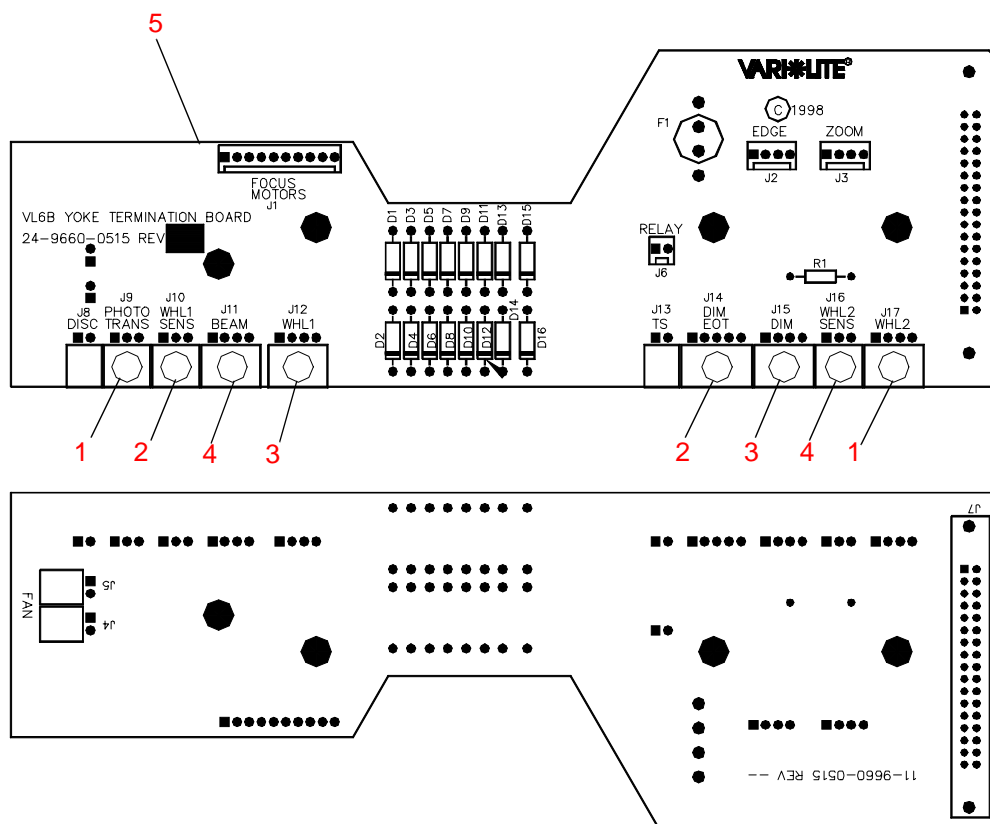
VL6B/VL6C Yoke Termination PCB Assembly
